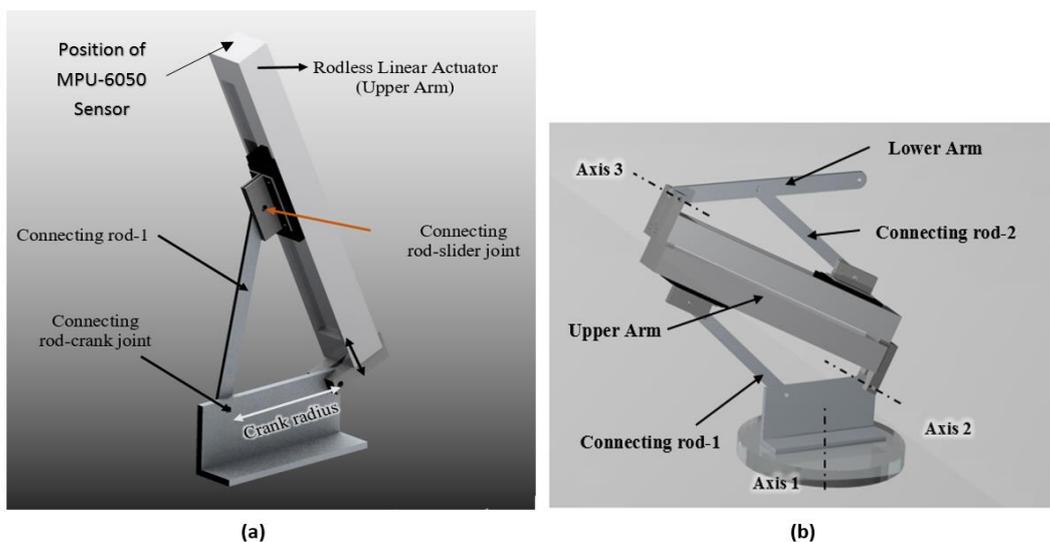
3D CAD model of crank mechanism of an arm (a) Upper Arm assembly of the robot arm (b) fully assembled robot arm with 3 axes
